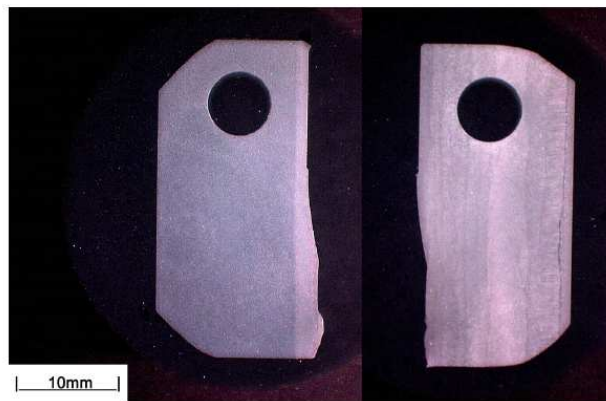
RQT 701 weld profile and compact tension specimen orientation
